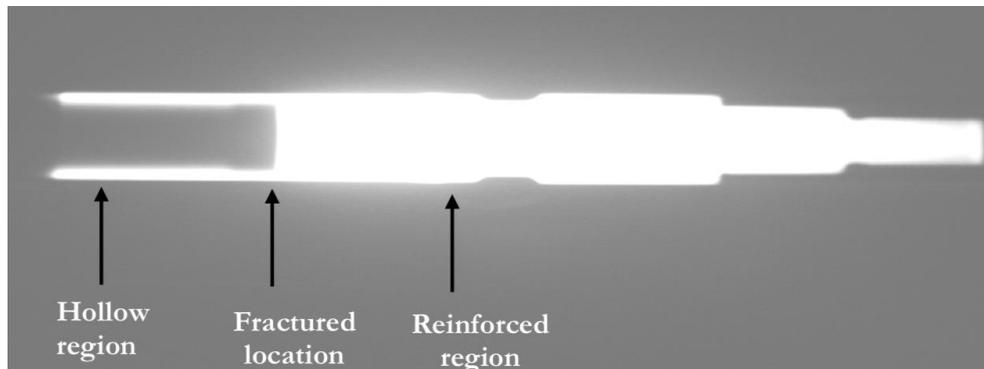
Radiographic testing of un-fractured tail rotor control rod
